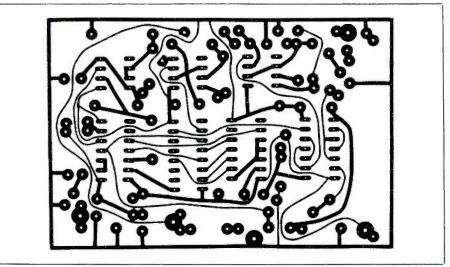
Actual-size etching-and-drilling guide for printed-circuit board.
